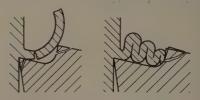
Over breaking, crowding and tool breakage caused by too steep a slope
